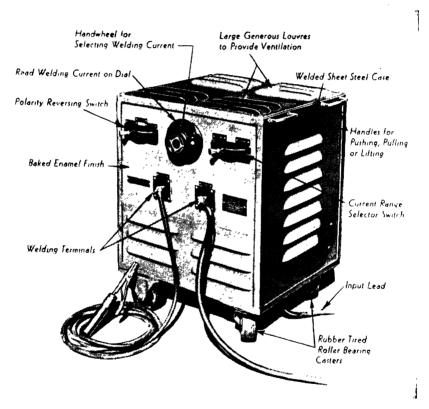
A rectifier tube arc welding apparatus (Courtesy of: Allis-Chalmers Mfg. Company)
